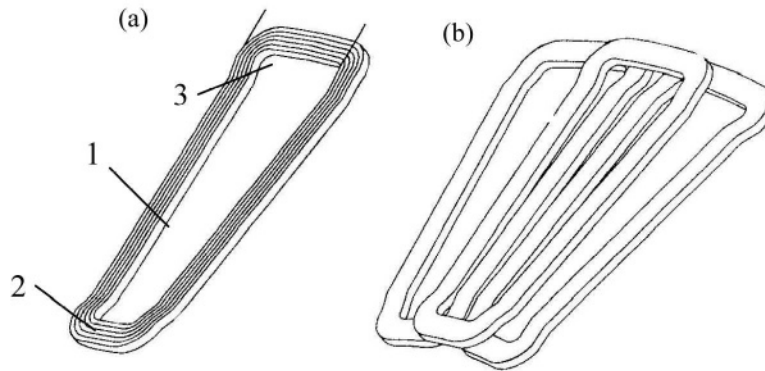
Disc-type coreless winding assembled of coils of the same shape according to U.S. Patent No. 5 744 896 [139]: (a) single coil; (b) three adjacent coils. 1 — coil side, 2 — inner offsetting bend, 3 — outer offsetting bend.
